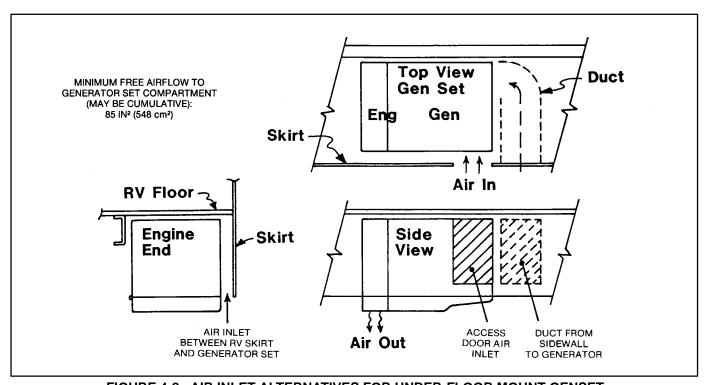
AIR INLET ALTERNATIVES FOR UNDER-FLOOR MOUNT GENSET
